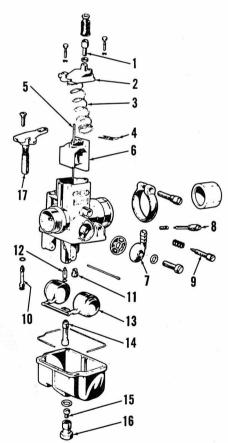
Exploded view of Del'Orto 22 MM carburetor used on all models.
